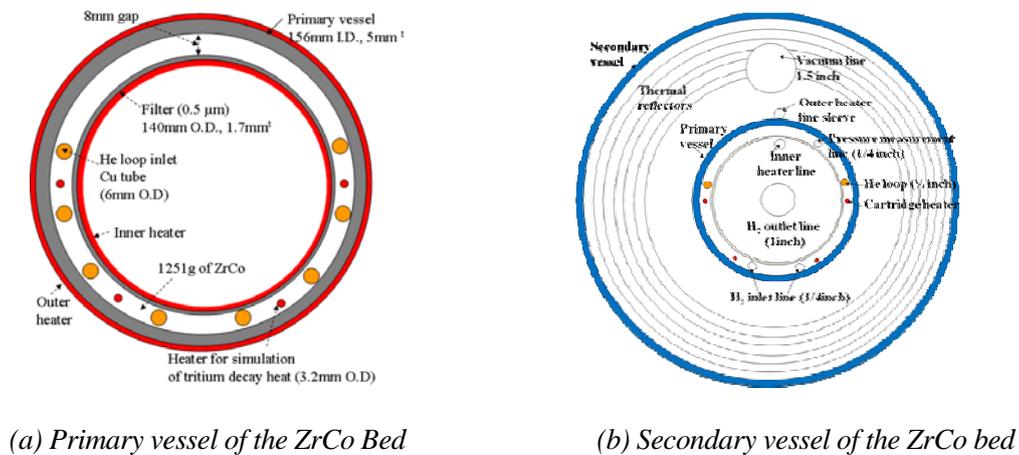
Radial cross-section view of the 1:1 ZrCo bed
